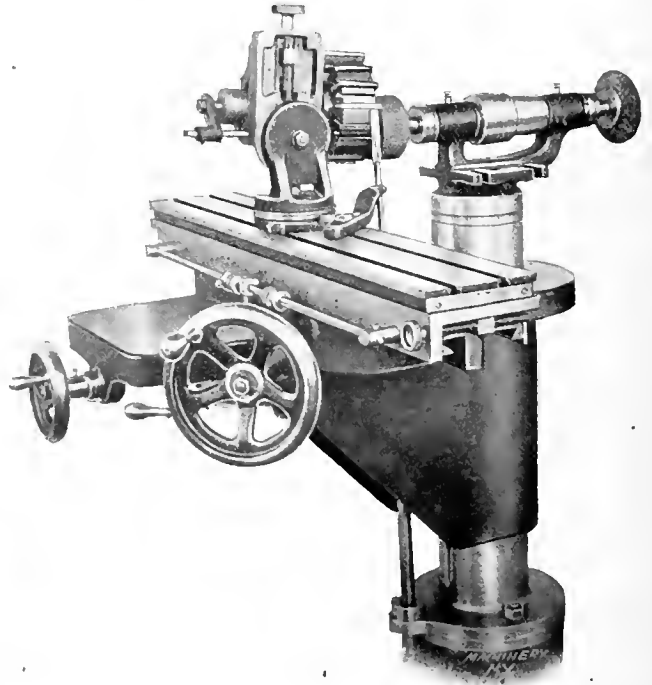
Sharpening a Face Mill, whose Shank is held in a Universal Taper Holder.
